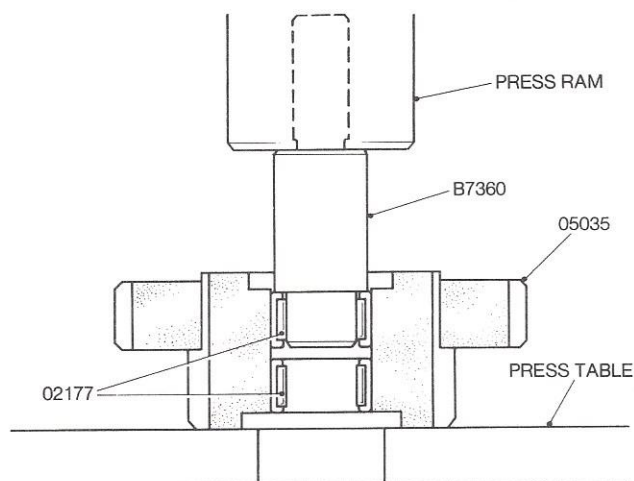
Removing the Layshaft Gear Needle Roller Bearings
